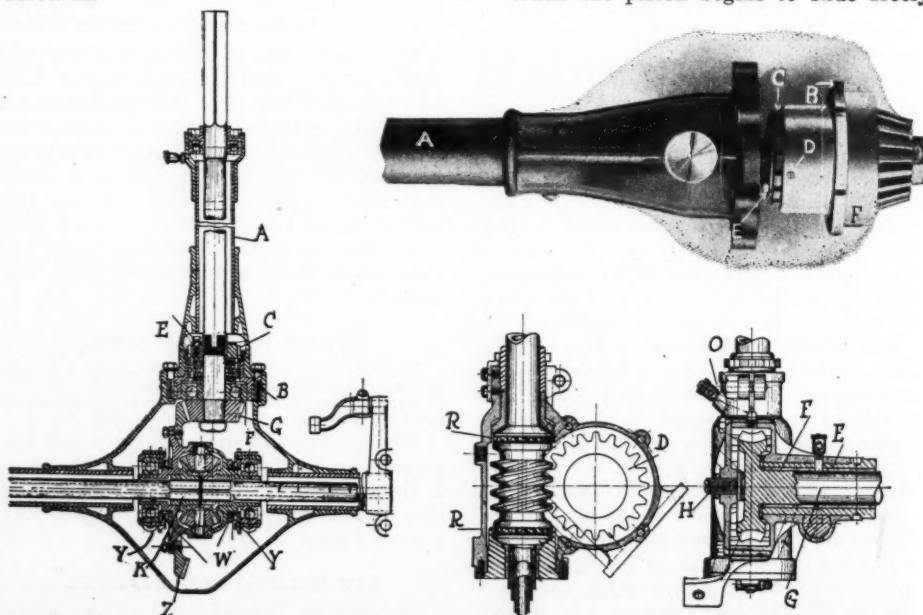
Adjustments on Chalmers differential and driveshaft pinion. Lower right, steering ing gear adjustments
